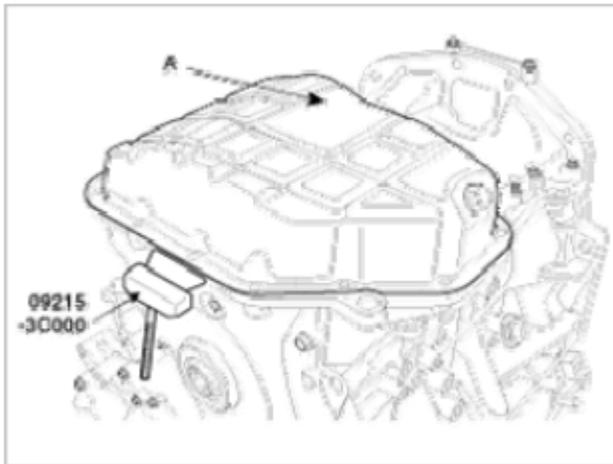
Removing Lower Oil Pan Using SST (09215-3C000)
